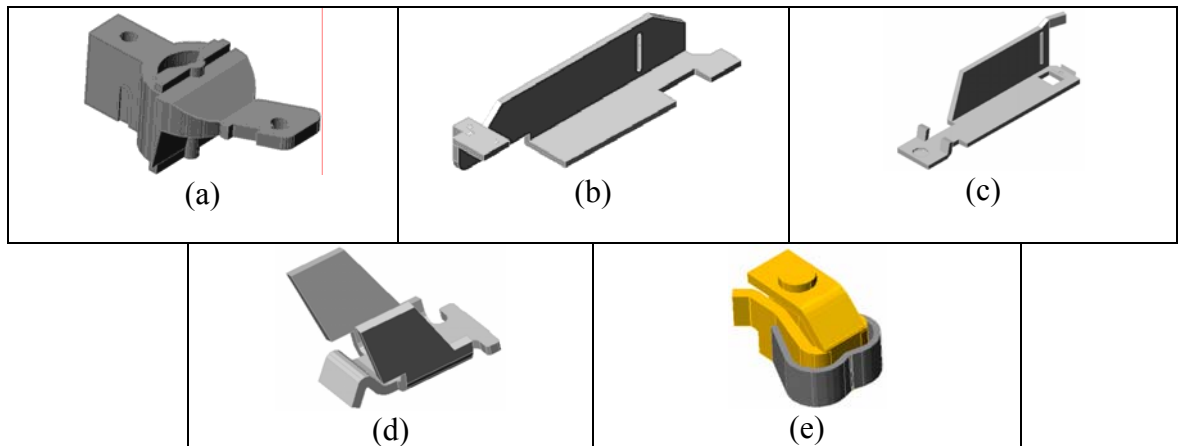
Studied parts: (a) handle, (b) magnet, (c) latch, (d) arc chute and (e) stab & contact.
